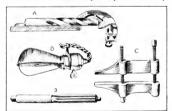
Useful Tools for the Garage and Repair Shop: A, Rev ington Twist Drill Grinding Gauge; R. Magna Clip, as Adjustable Device for Drop Lights; C, Le Count Vise Clamp; D. Peerless Expansion Renmer.
